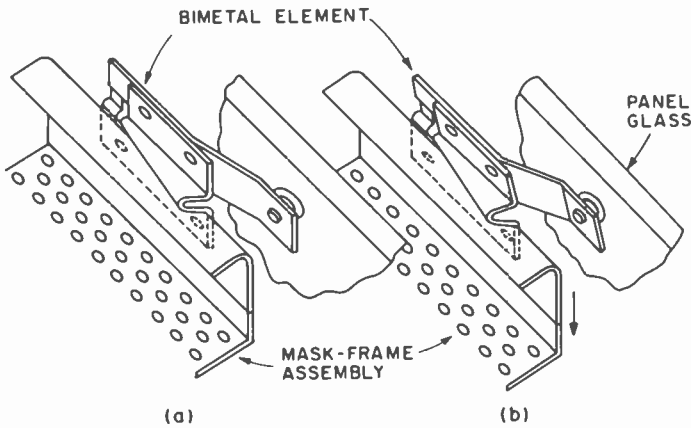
Bimetal element providing axial movement of the mask-frame assembly to compensate for misregister caused by electron-beam heating of the mask, (a) unheated and (b) heated with arrow showing direction of motion.
